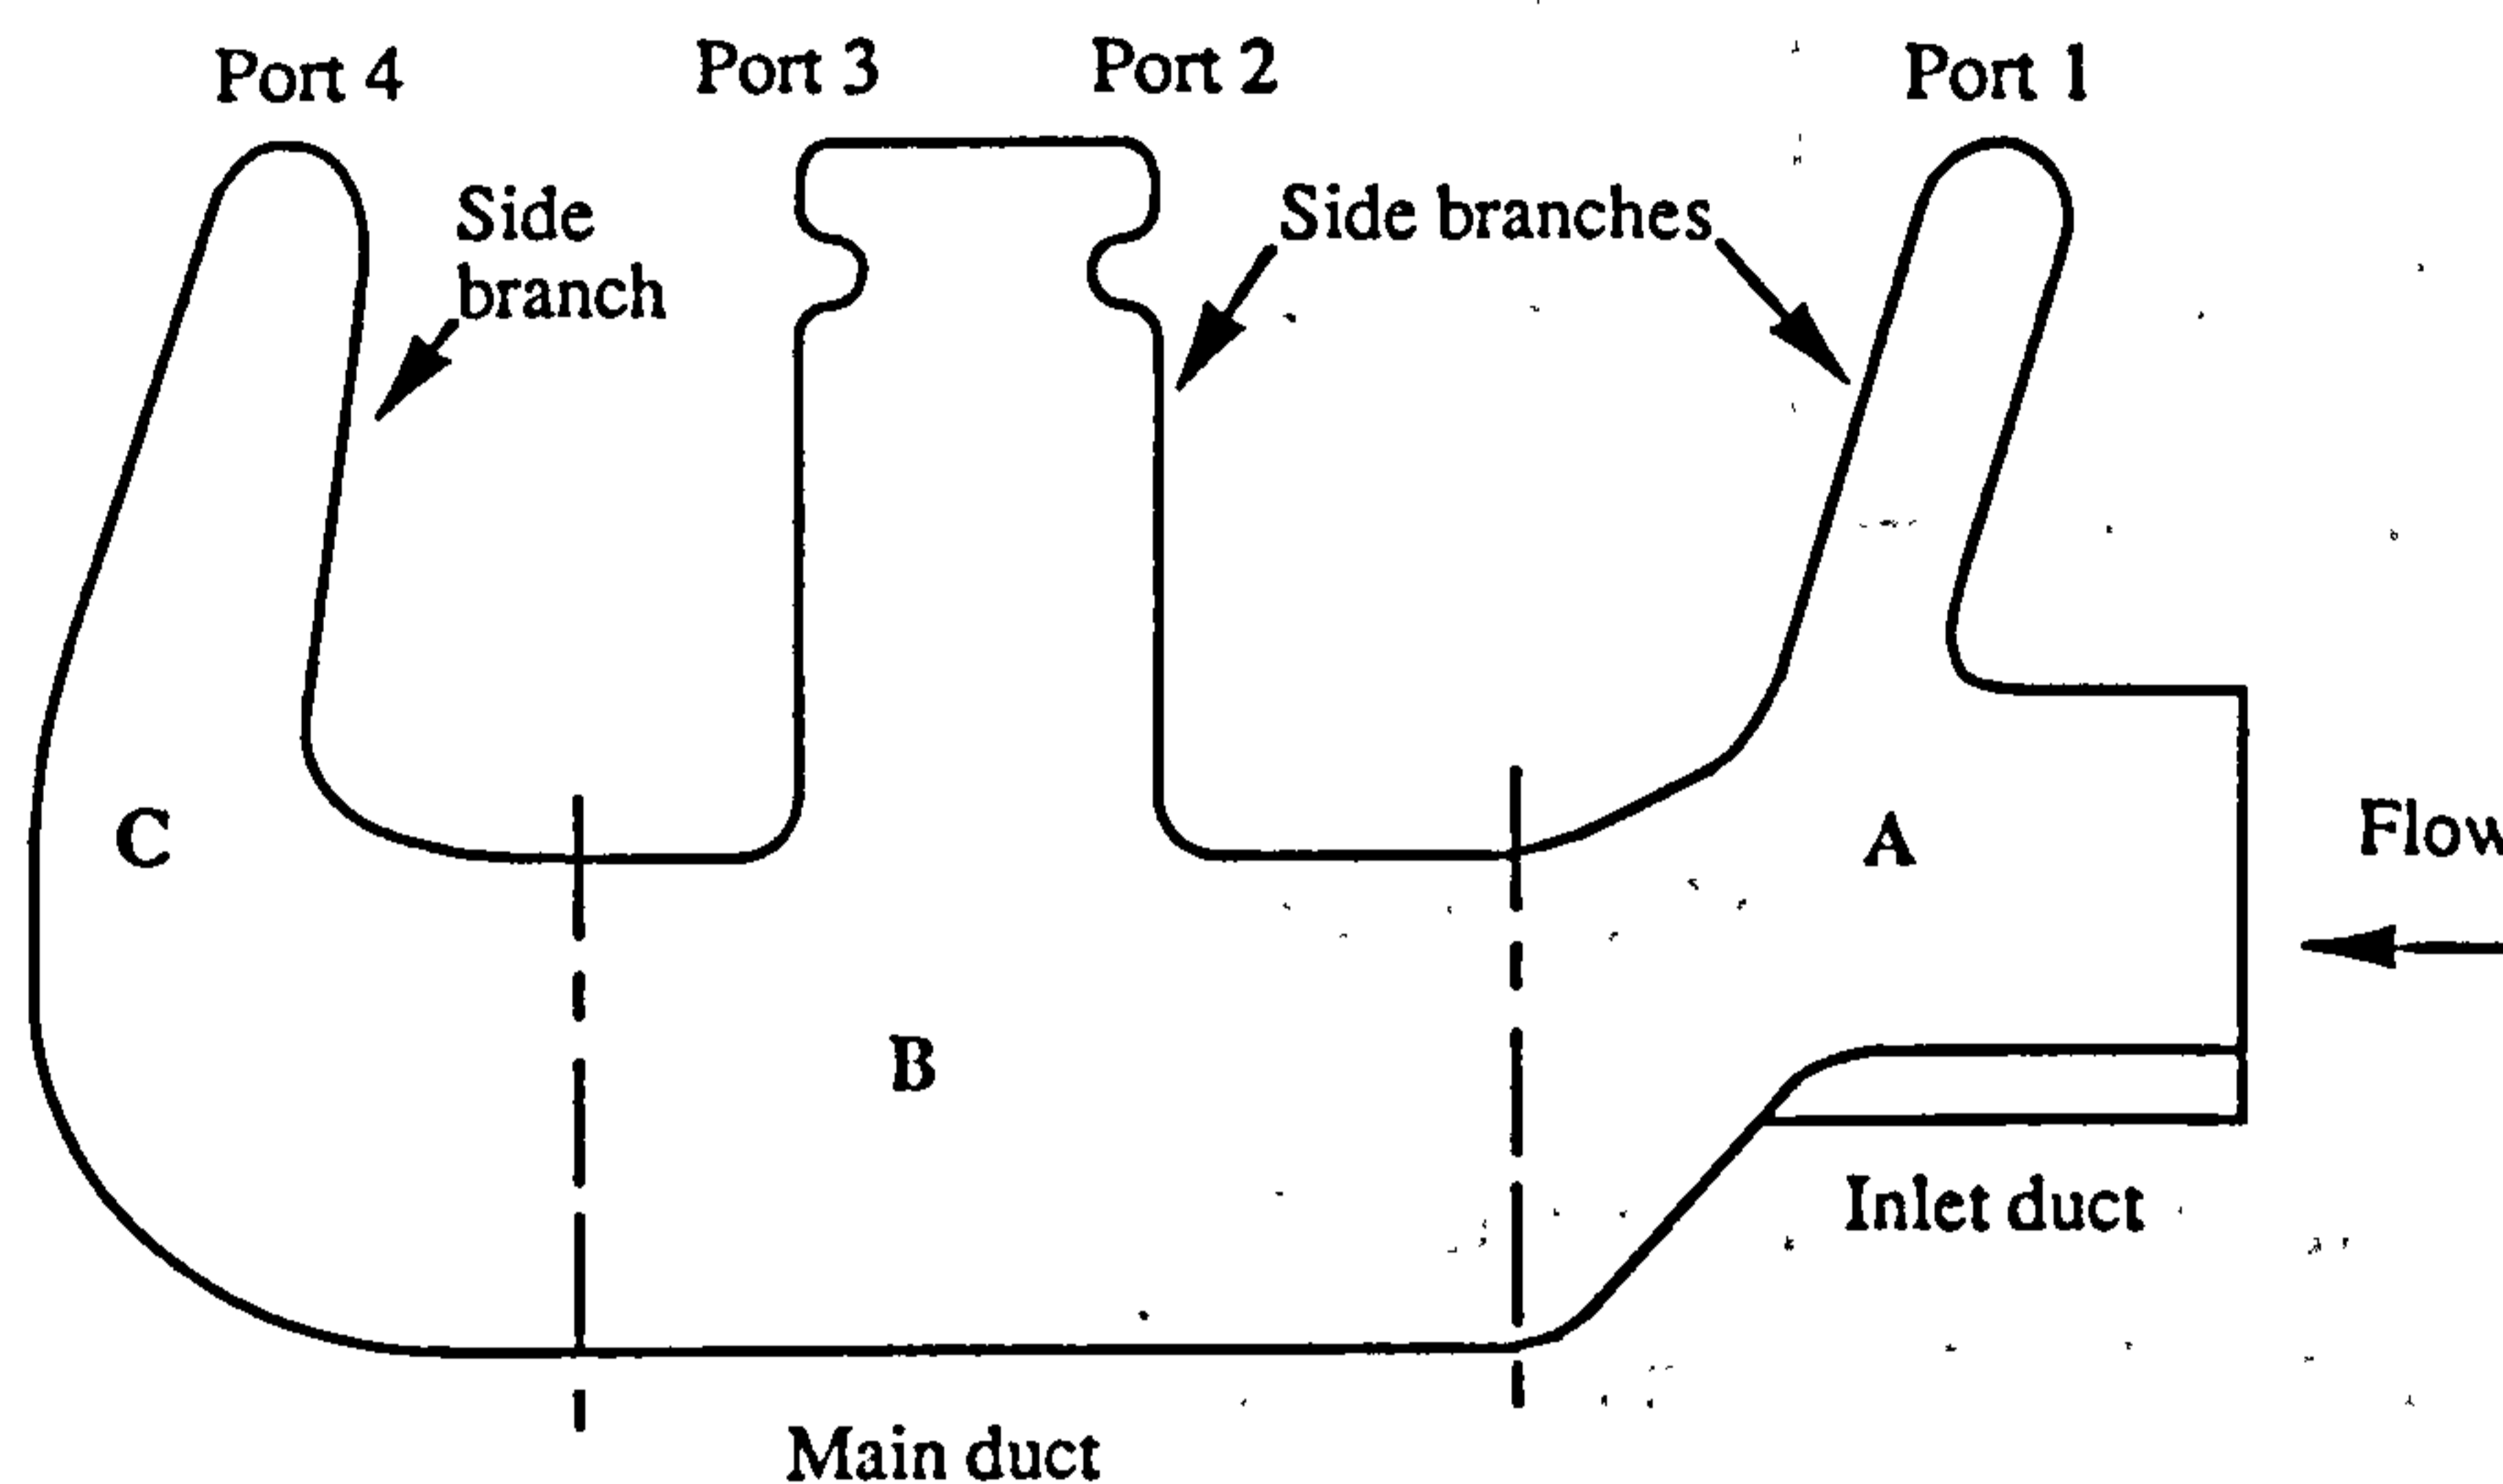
Thumbnail sketch of the inlet manifold in elevation.
